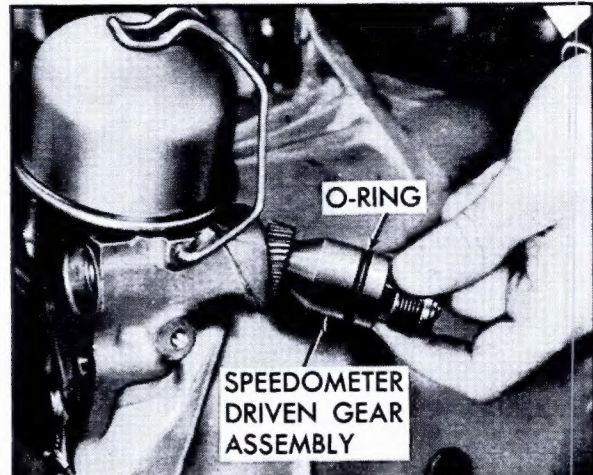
Installing Speedometer Driven Gear Assembly
